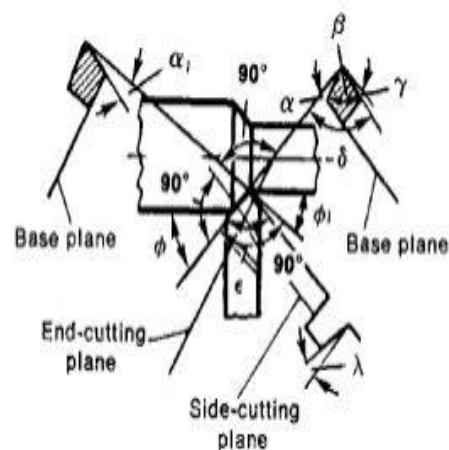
Nomenclature of a Single Point Cutting Tool
